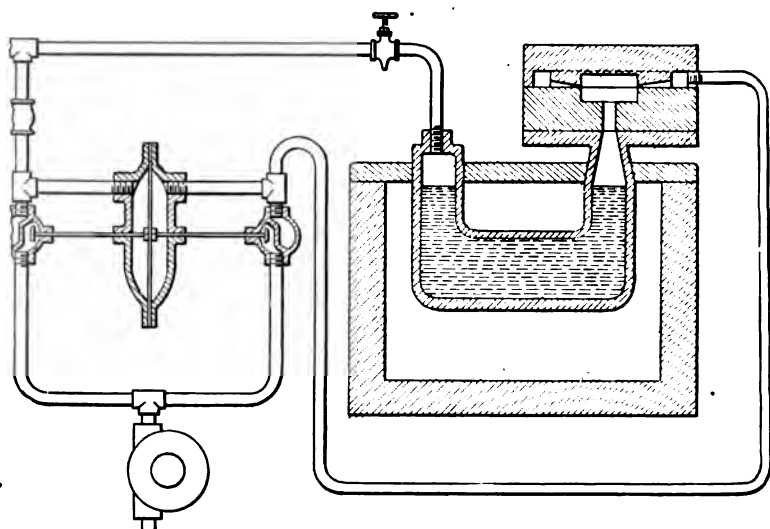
DIE-CASTING MACHINE WITH VACUUM APPLIED DIRECTLY TO DIE.
